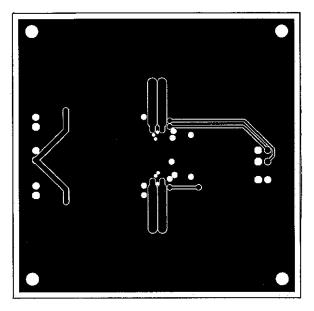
Recommended MH PC Board Layout: Lower Inner-Layer Layout
